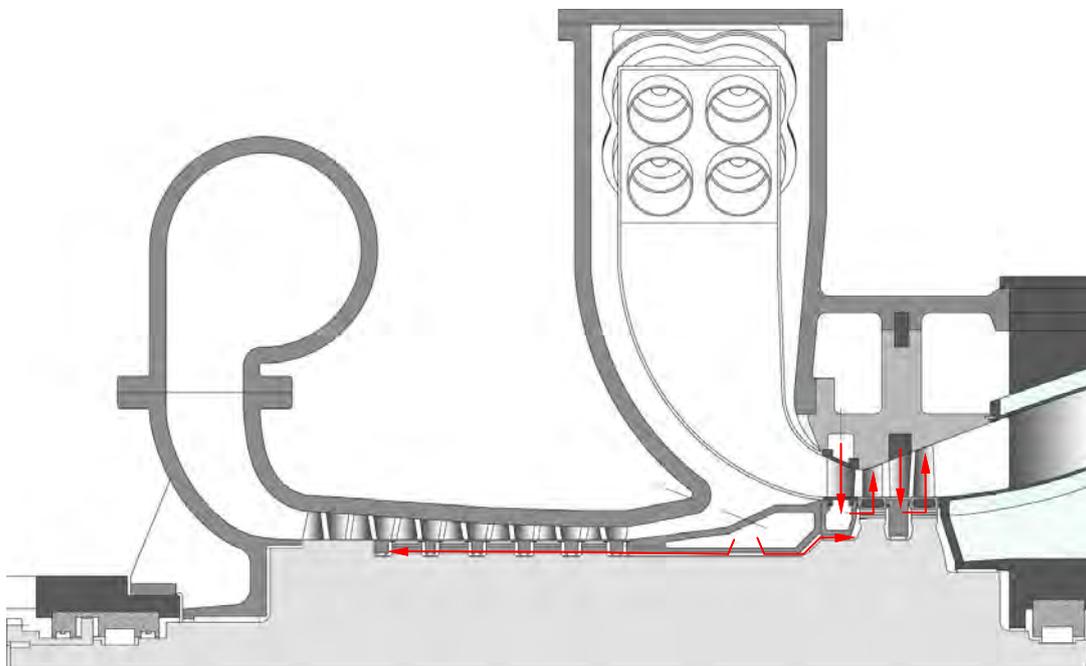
Design of C2 drum rotor with cooling steam flow arrangement, combustor and HTTC
